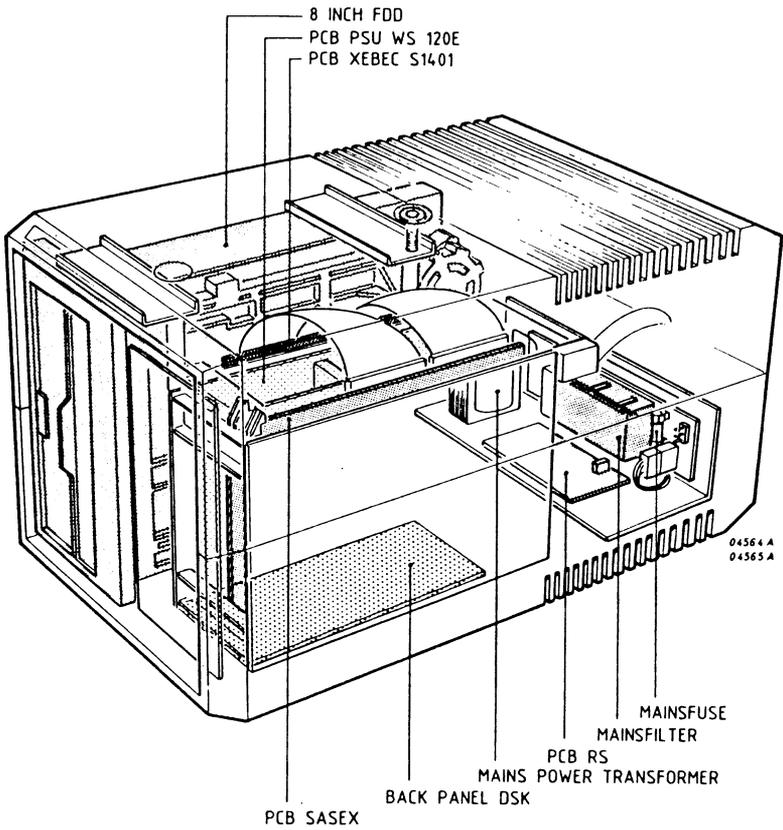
LOCATOR OF EXTENSION CABINET P2621
